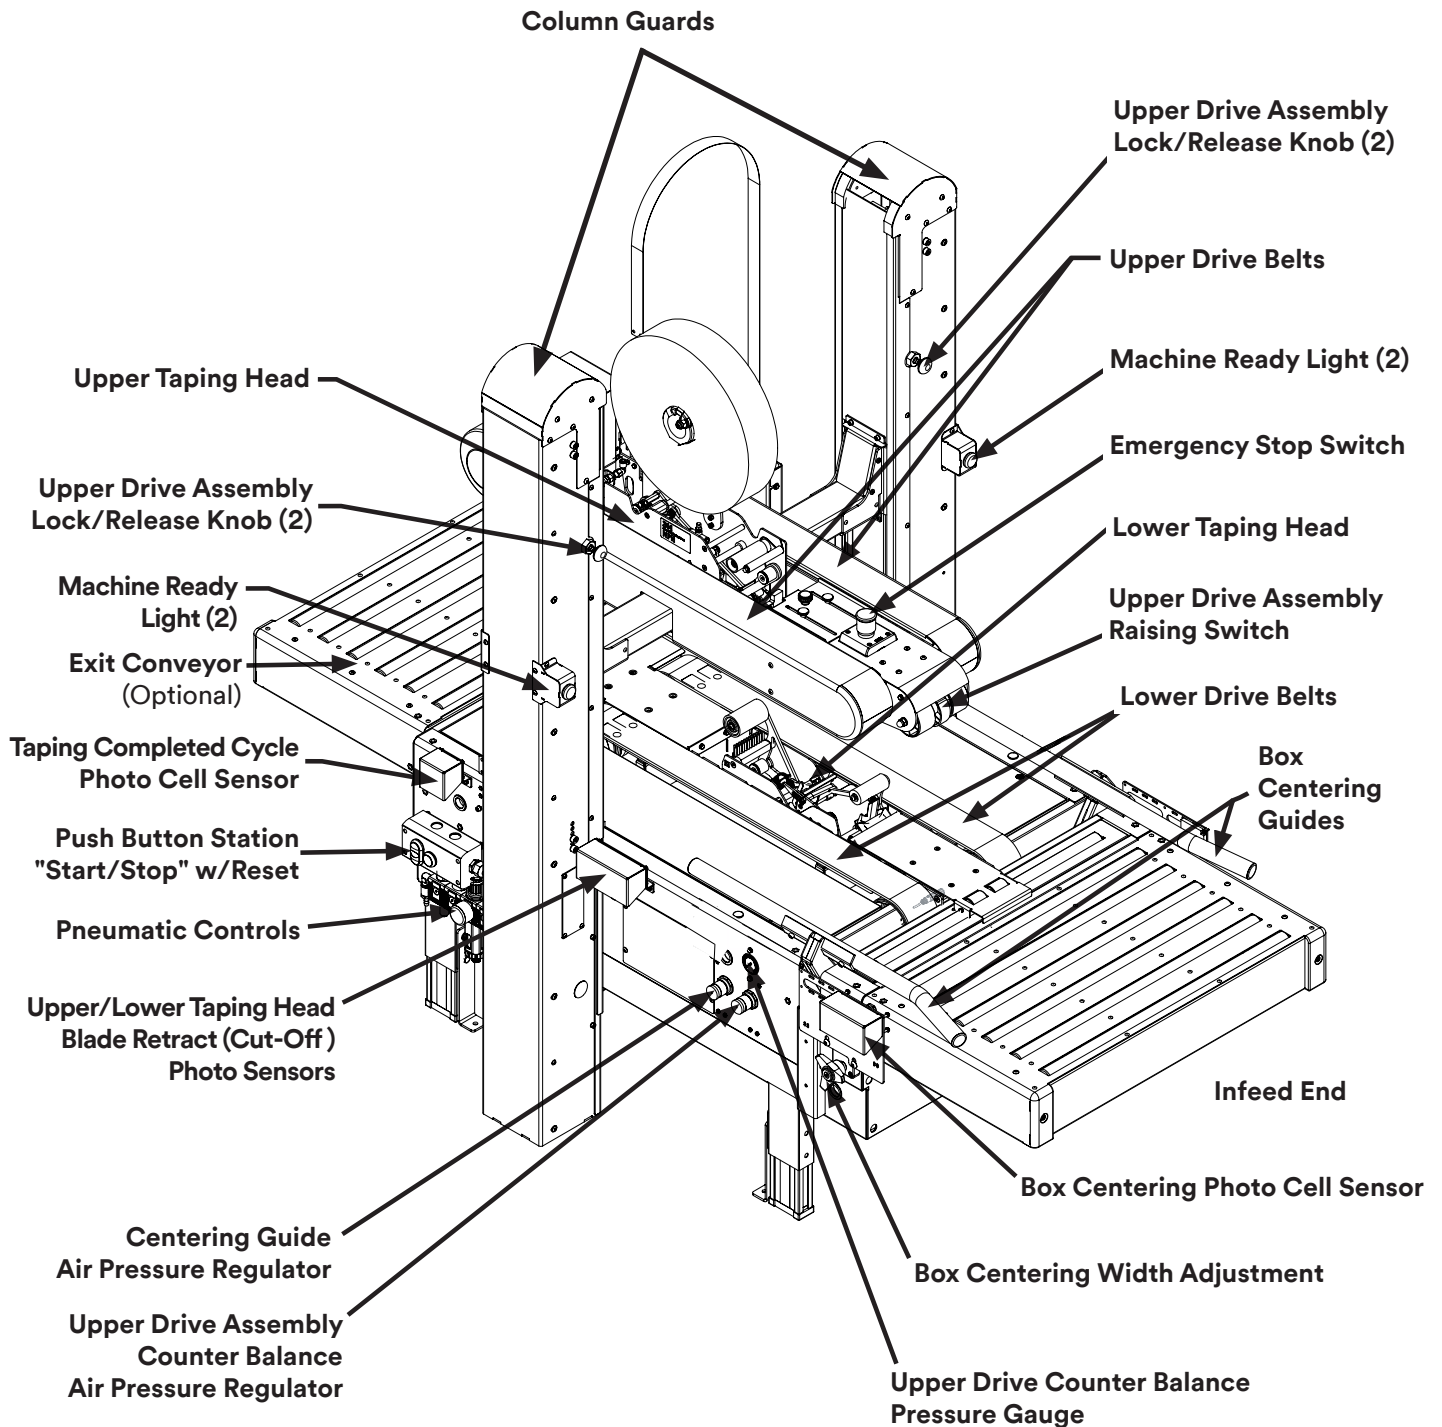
7000r-7000r3 HS Pro Case Sealer Components (Left Front View)
